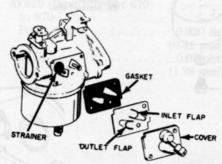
View of late type fuel valves. Earlier type is pressed into carburetor body behind the fuel inlet fitting.
